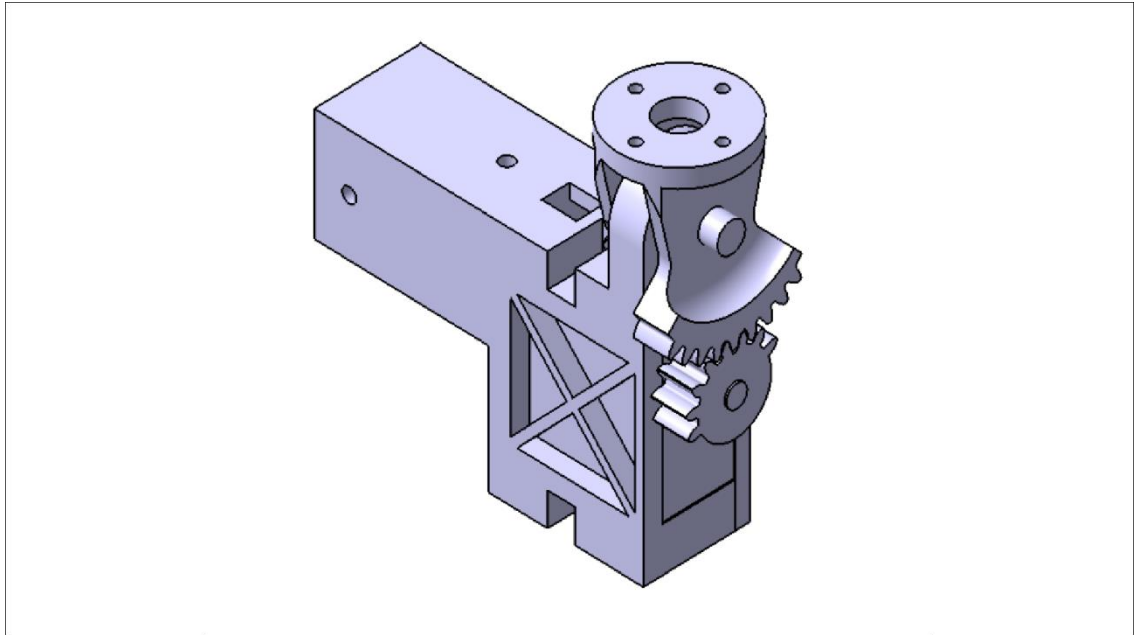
5 Modified Gear Mesh Mechanism with Only Useful Gear Tooth.
